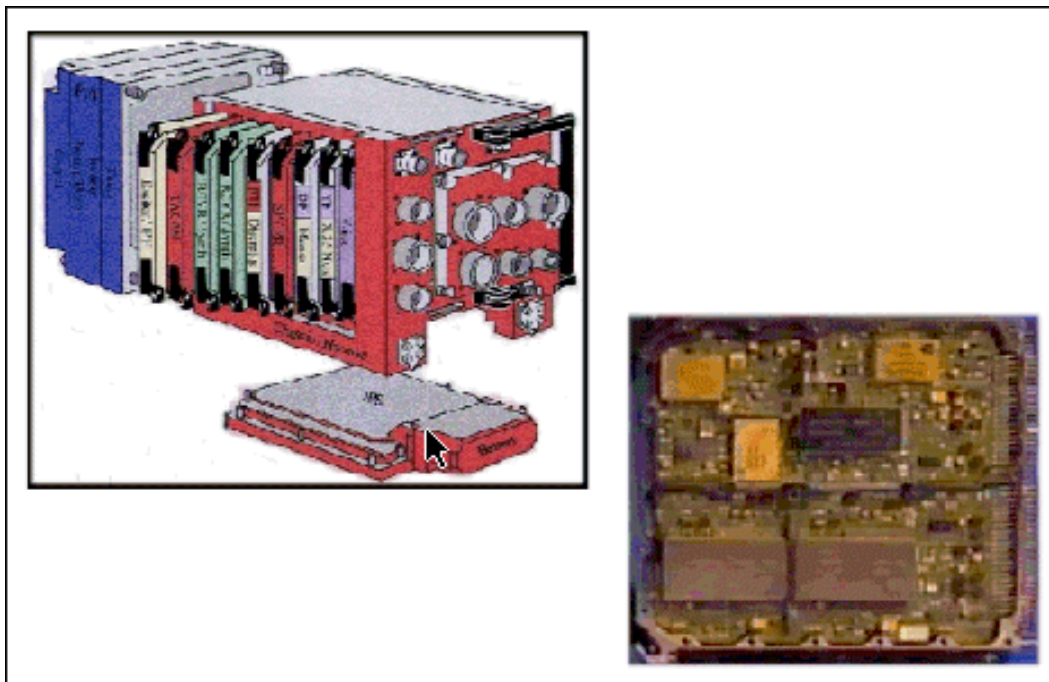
MIDS LVT Exploded View and Shop Replaceable Card.[7]
